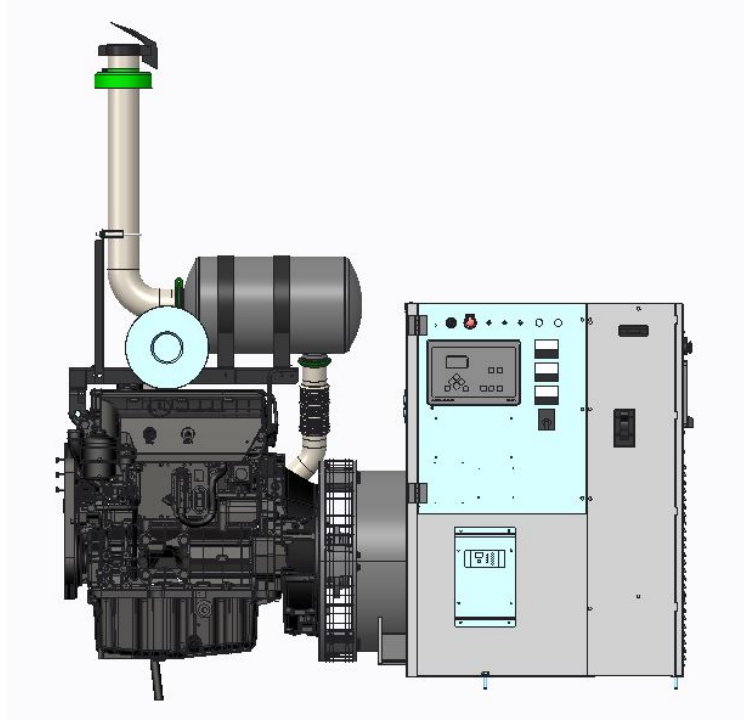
volume shrink-wrap of the engine, generator and the master box assembly. The part is hollow inside and only the outer shell is visible.
